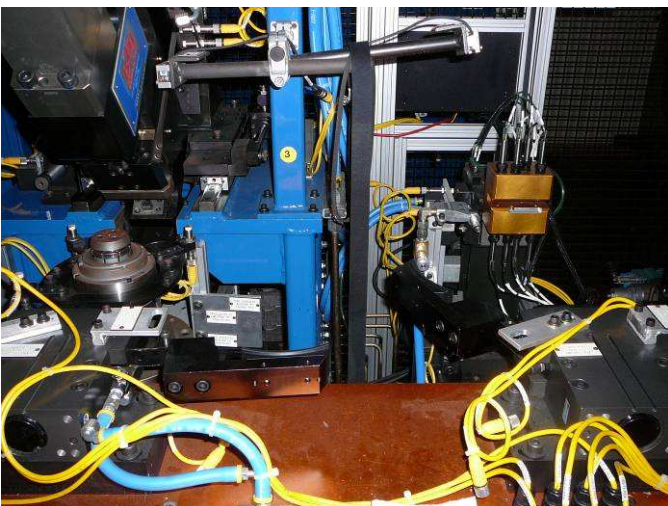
Torsional Damper Assembly - Arm base (W-055/P-059).
